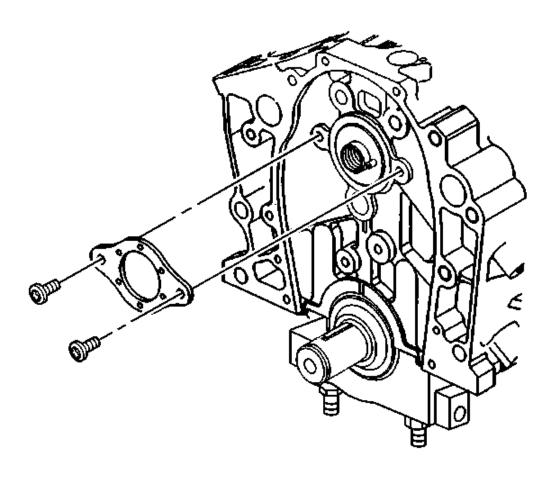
View Of Timing Chain Dampener & Bolts Courtesy of GENERAL MOTORS CORP.
